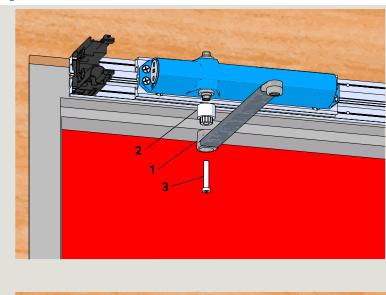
Closer adapter and closer assembled to backplate
